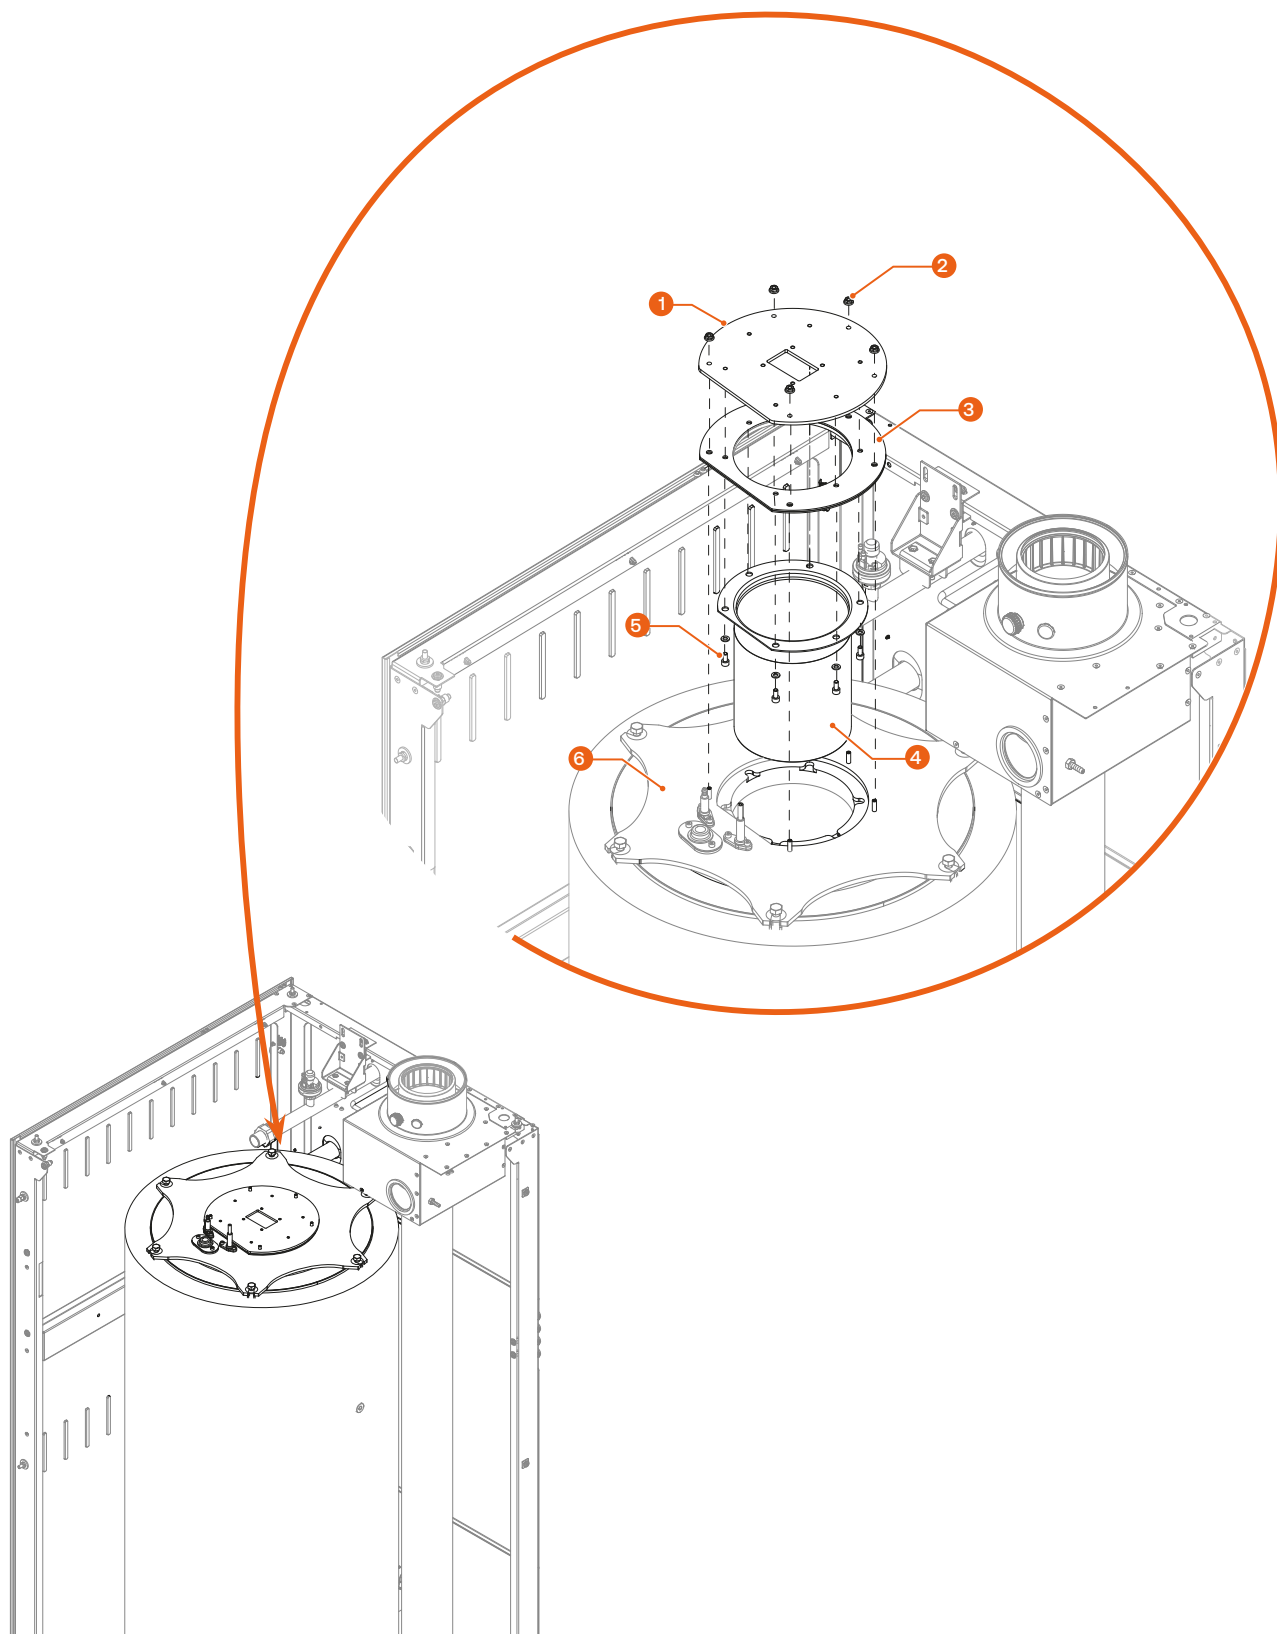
Removing and Installing the Burner - CM 100 - 120
